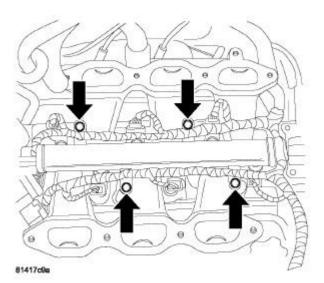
FUEL RAIL BOLTS LOCATIONS Courtesy of CHRYSLER LLC
